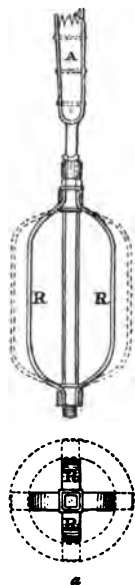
Lantern for guiding lower end of boring-rod. a, plan of lantern.
